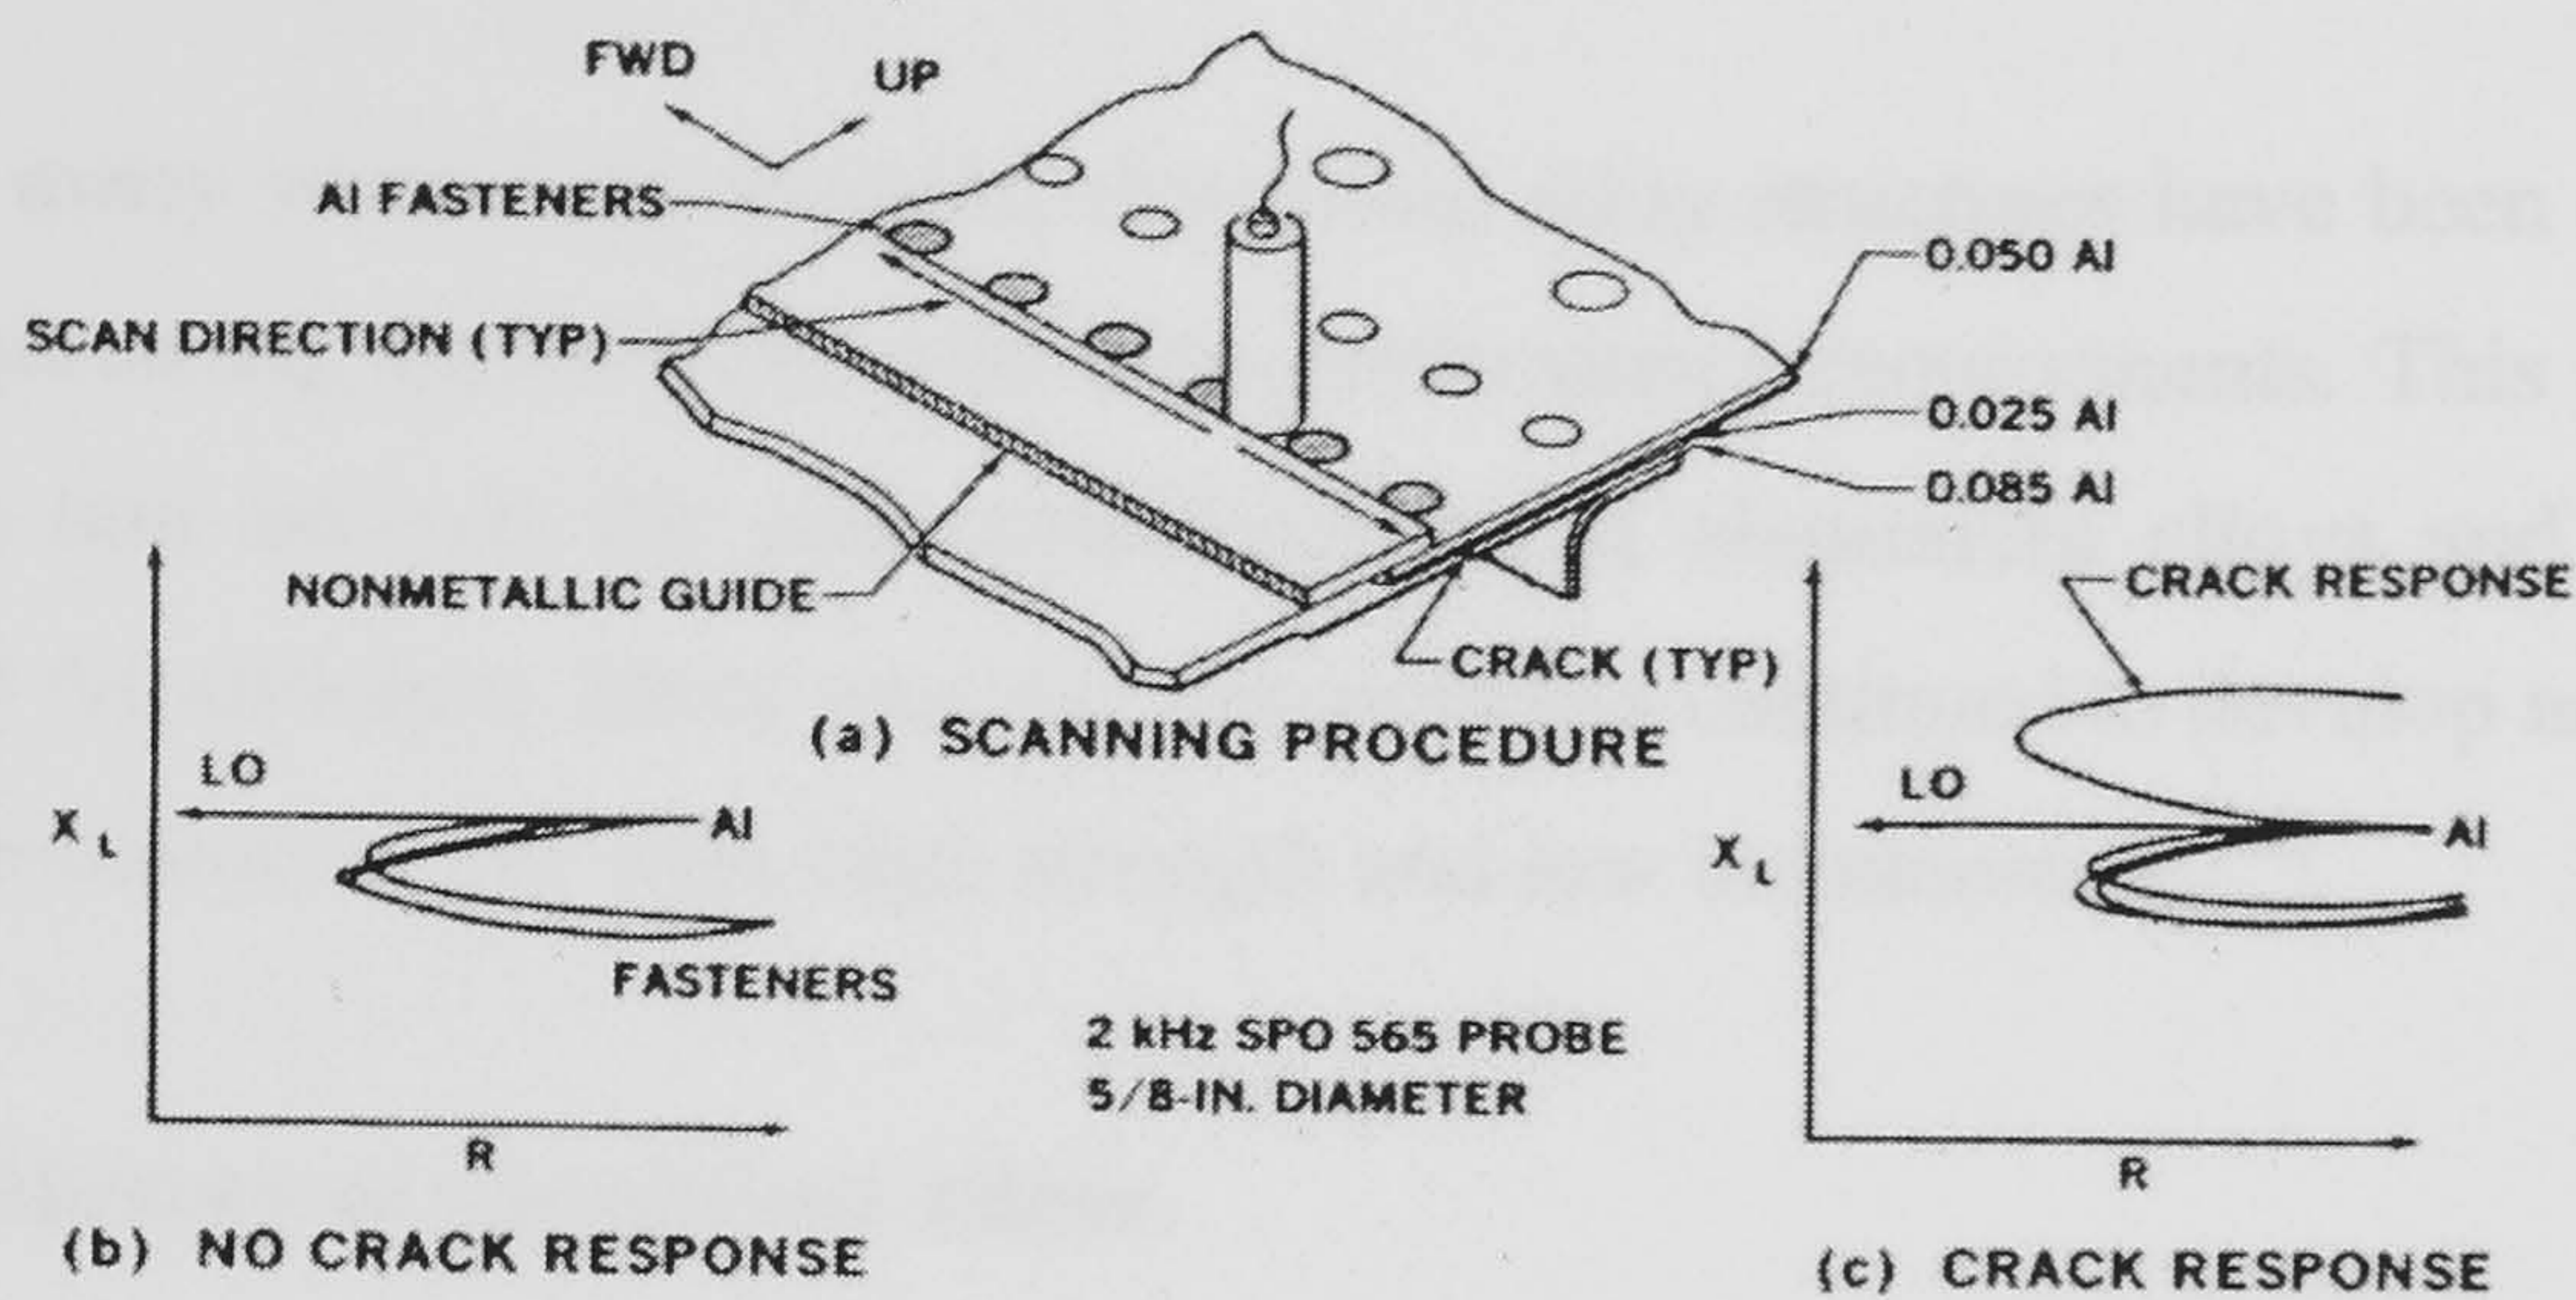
Detection of cracks in the second layer by scanning over aluminium fastener holes ^[27].
